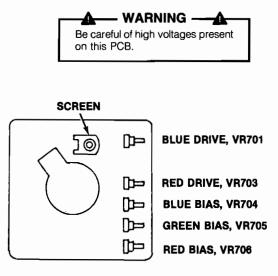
Locations of Tracking Adjustments on the CRT PCB
